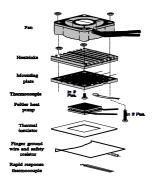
Exploded assembly diagram of thermal feedback unit
